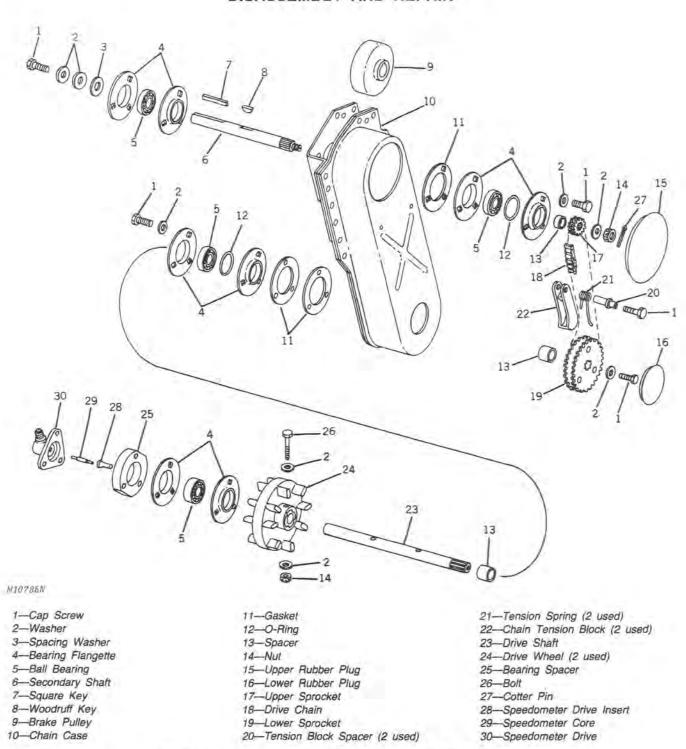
Exploded View of Chain Case, Secondary Shaft and Drive Shaft
